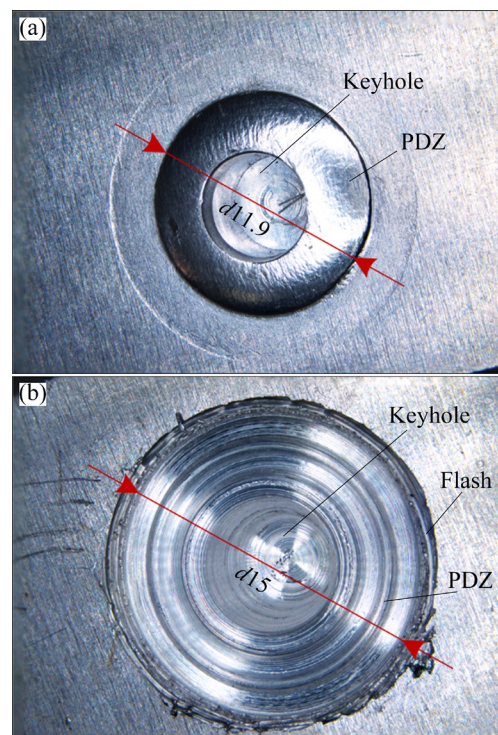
Macroscopic appearance of joint: (a) Flat clinched joint; (b) Repaired joint (unit: mm)
